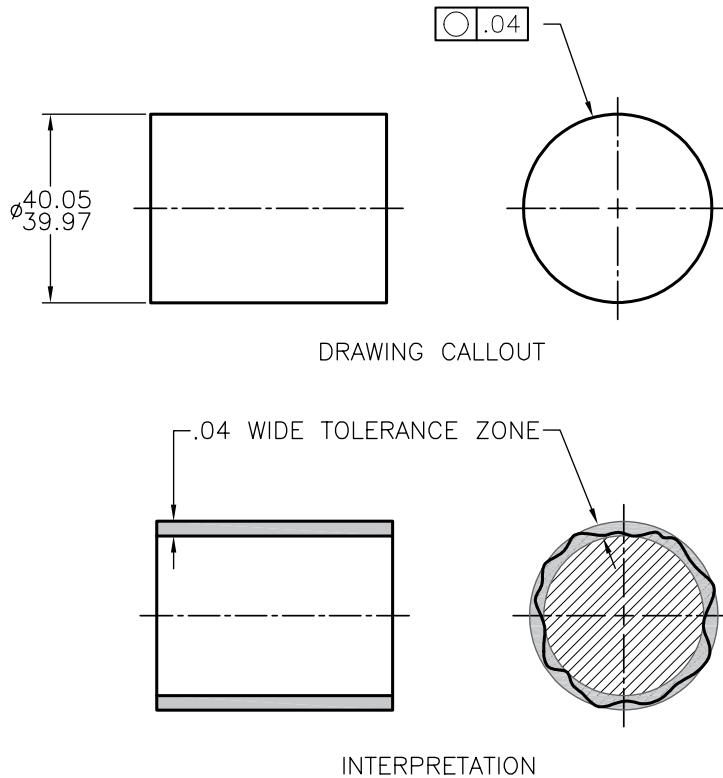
Circularity tolerance applied to a cylindrical feature
